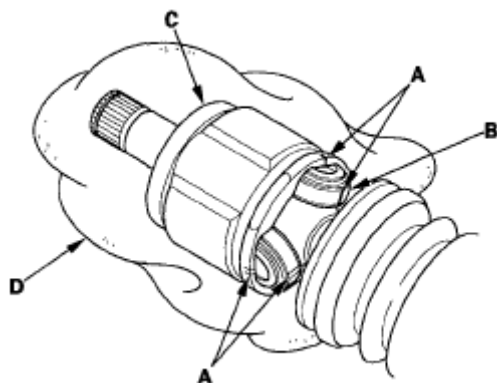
Identifying Scribe Marks On Rolling Surfaces
